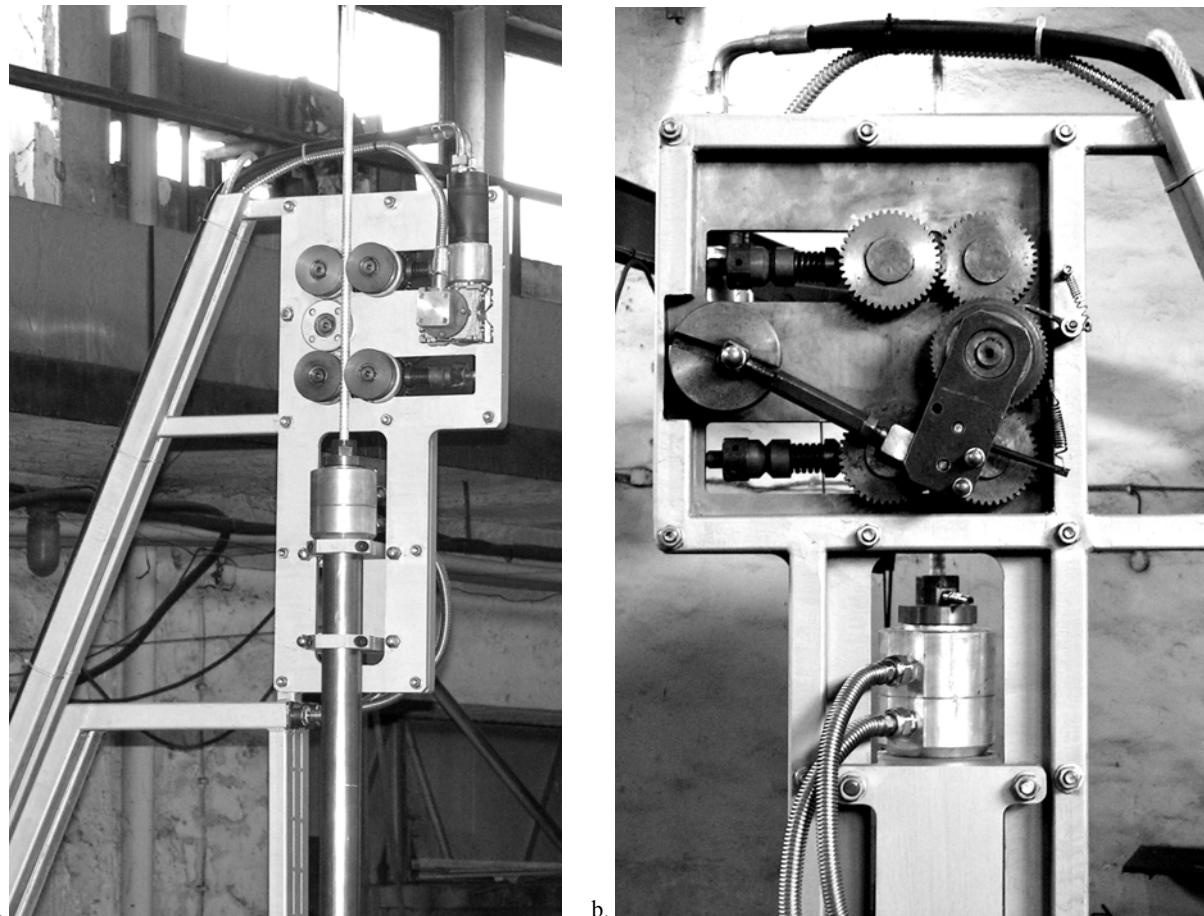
Installation for upwards continuous casting of aluminium wires, /13/: a) support structure with mould and drawing mechanism; b) moving eccentric with ratchet and gear mechanisms.
